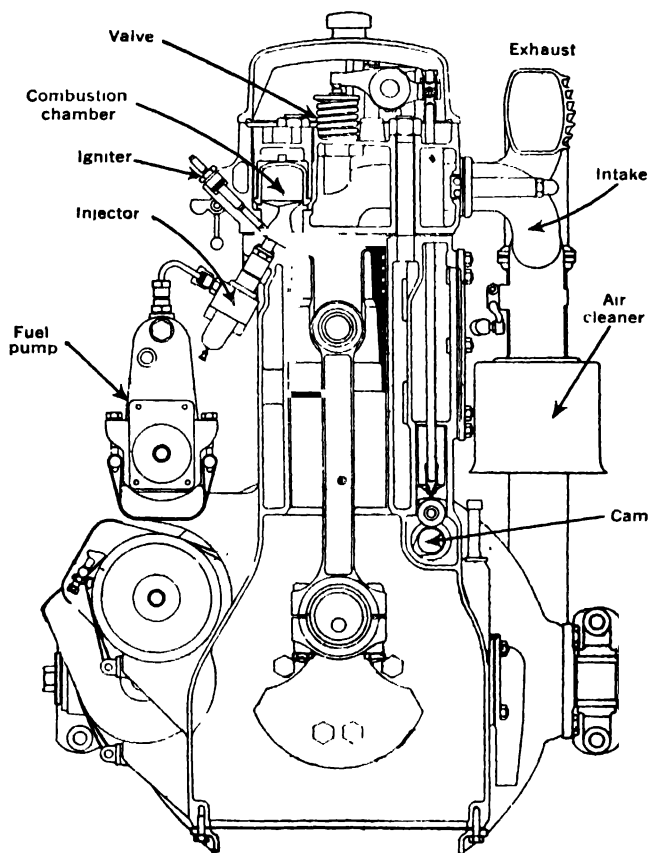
Cross Sectional View of the Saurer-Diesel Type Motor Truck Engine Which Weighs About Ten Pounds per Horsepower.
